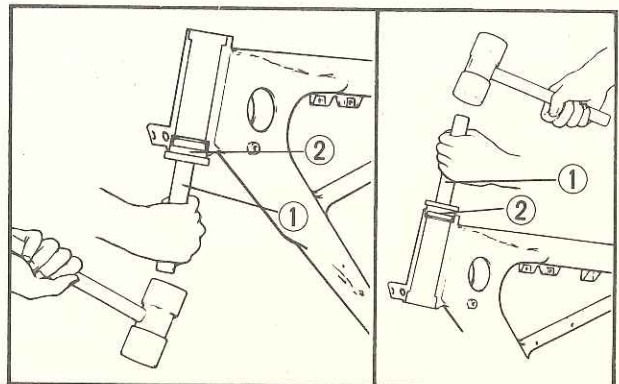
(1) Ball race driver (2) Race driver attachment
